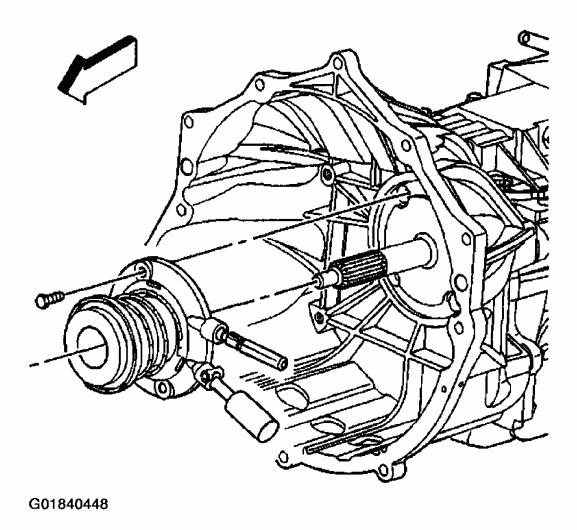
Installing Clutch Actuator-To-Input Shaft
